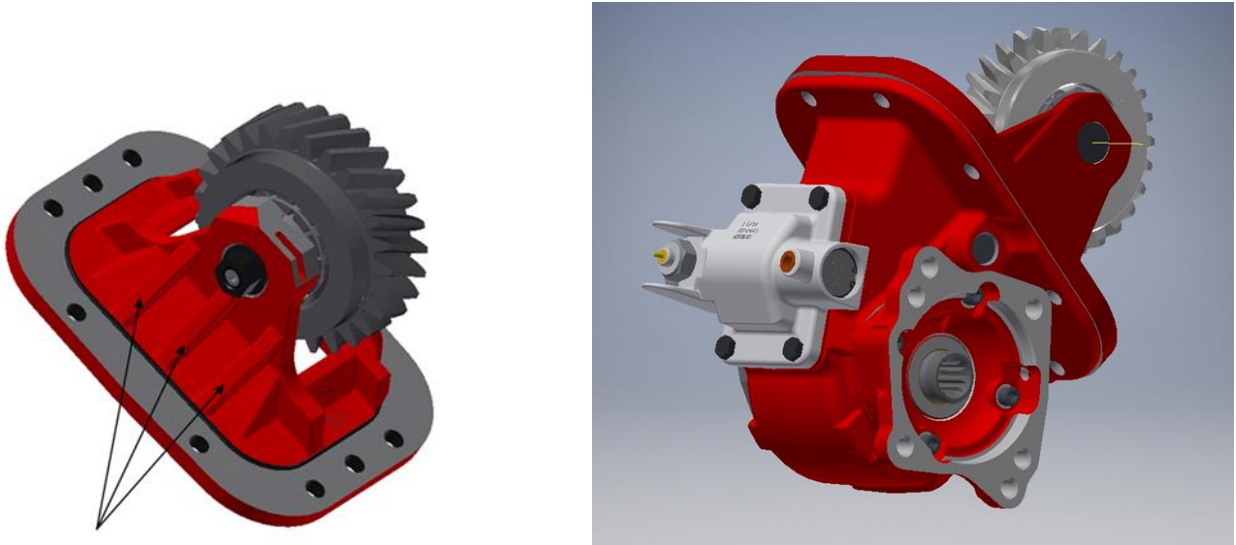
PTO Adapter and Adaptor/PTO housing assembly
